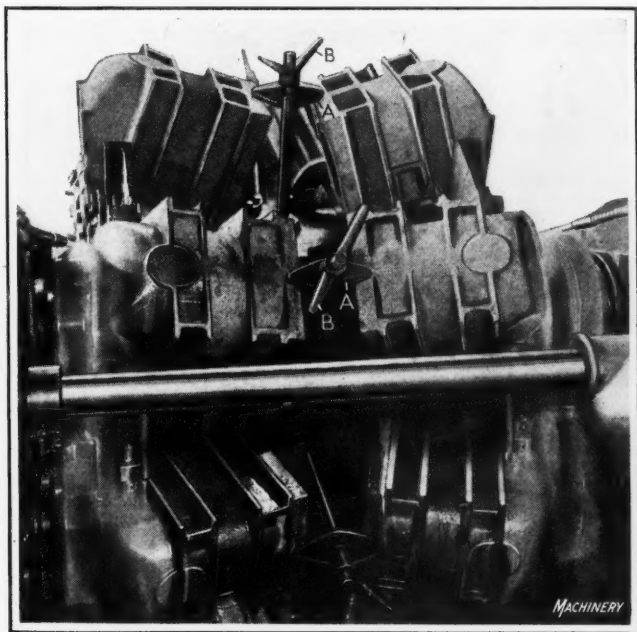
Continuous Rotary Milling Machine for milling Cover Seat on Malleable Iron Railway Car Journal Boxes
